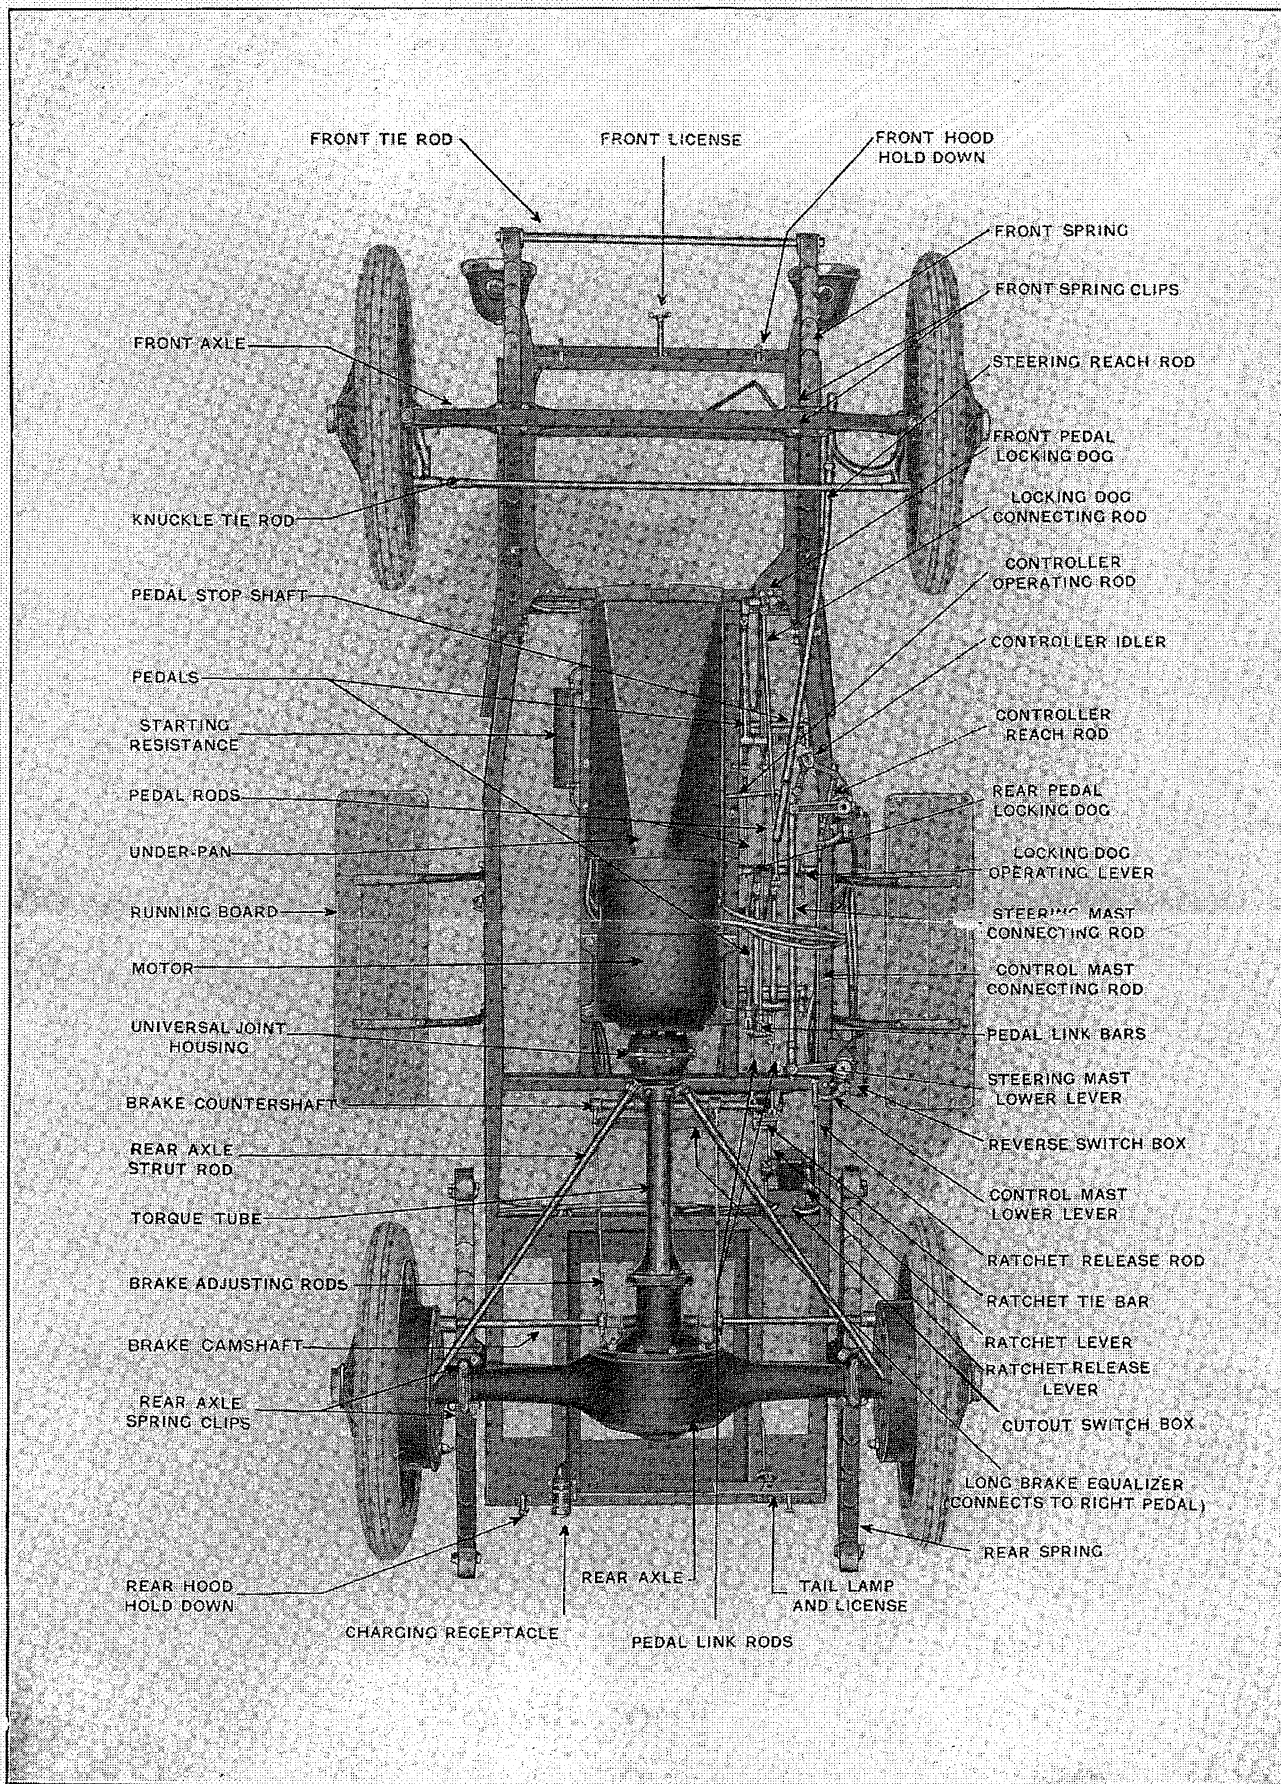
Driving Unit Showing Brakes on Motor and Wheels
